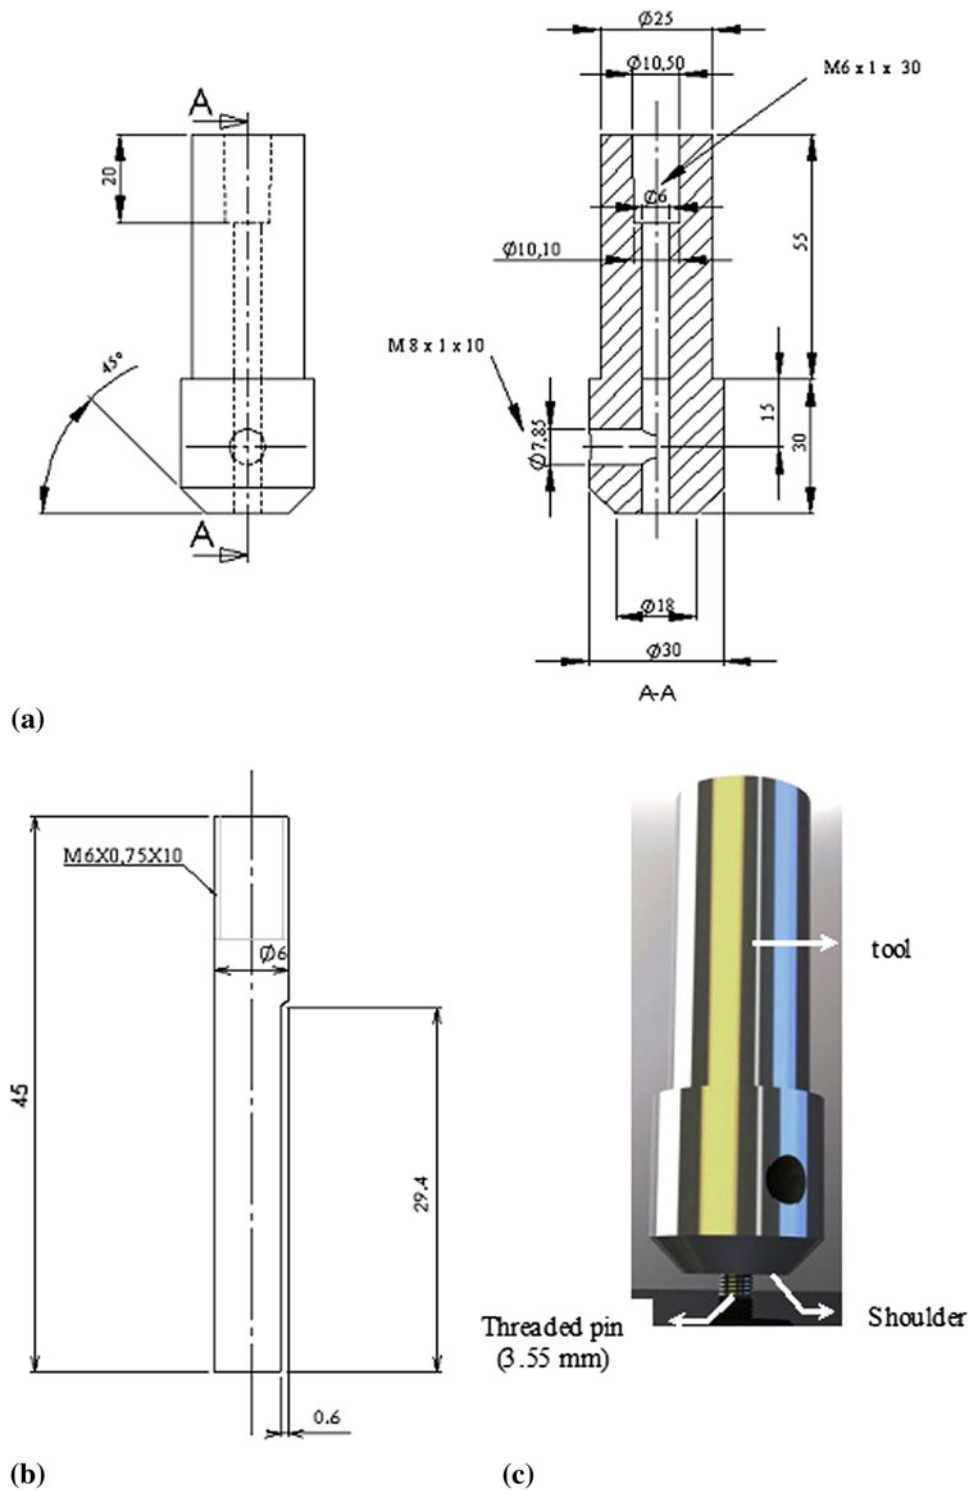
Technical drawing of (a) the shoulder, (b) the pin, and (c) solid pattern of the tool
